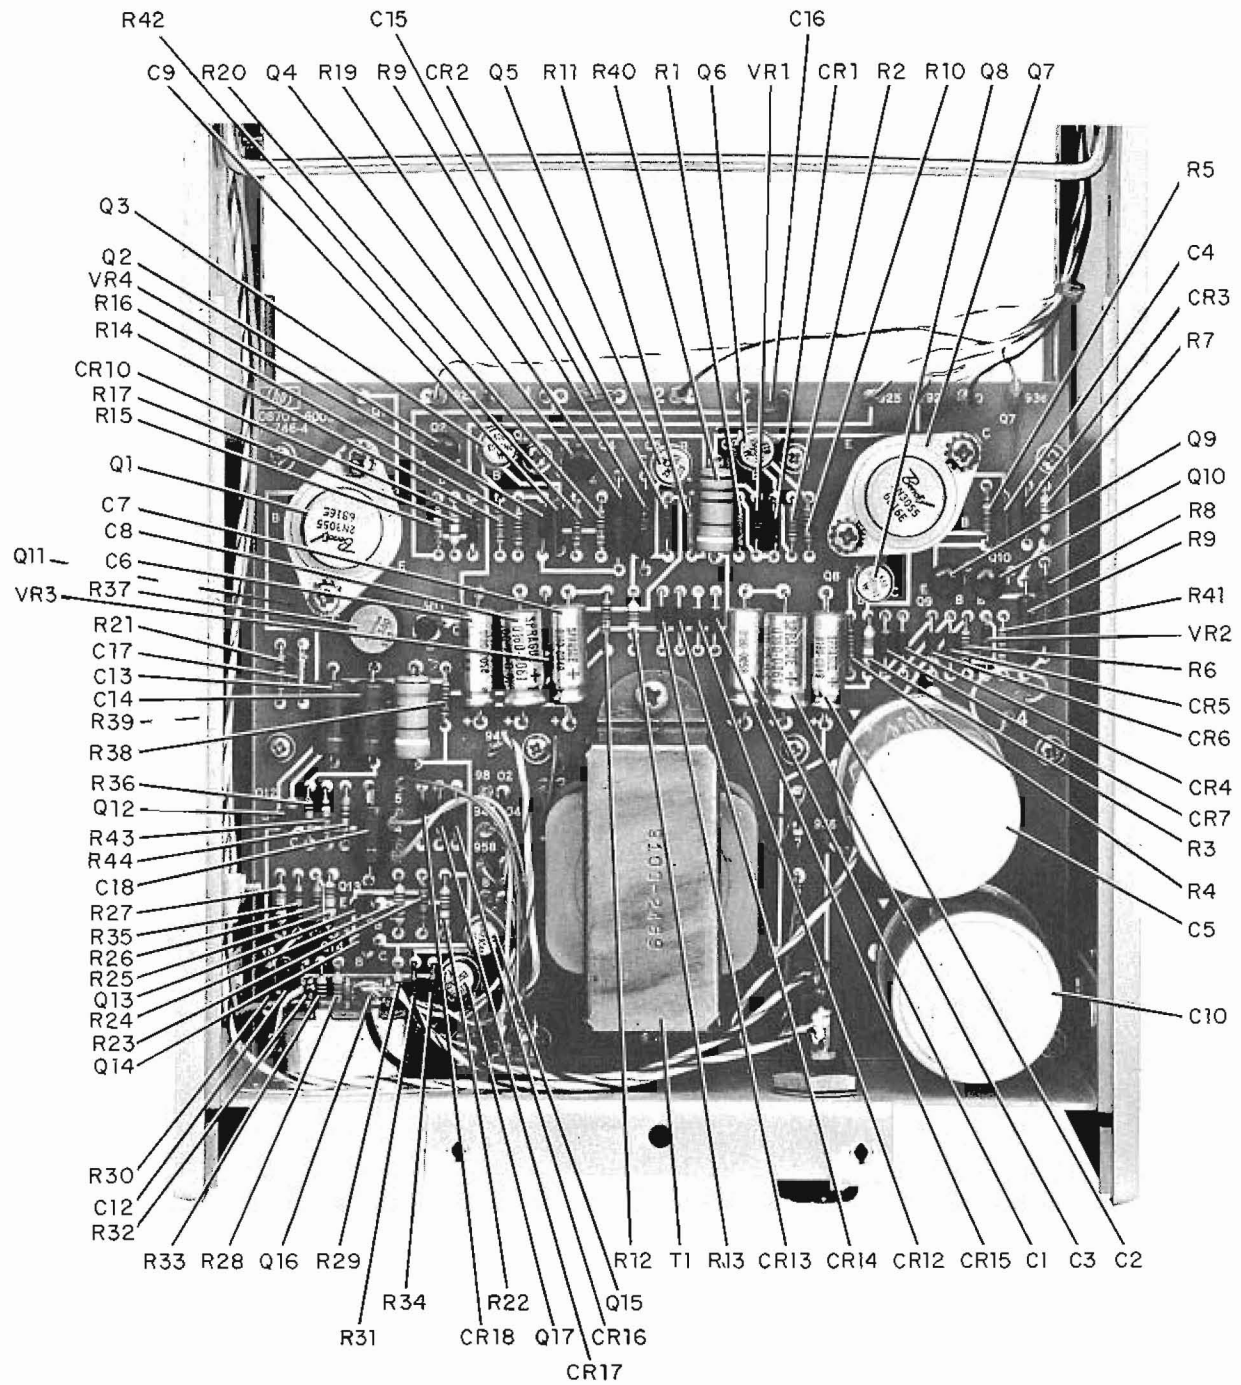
A1 Power Supply/Amplifier Board Assembly Power Supply Component Identification and Location
